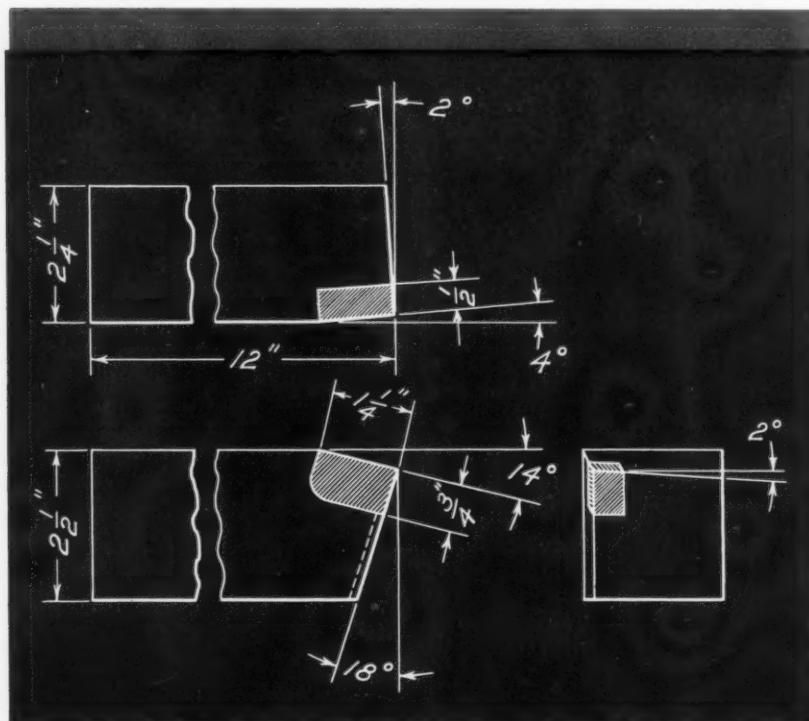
Turning Terminal Shank Forgings at a Speed of 271 Surface Feet per Minute, with an Average Depth of Cut of 3/16 Inch and a Feed of 0.015 Inch by Employing a Lathe Tool with a Negative Rake of 2 Degrees
